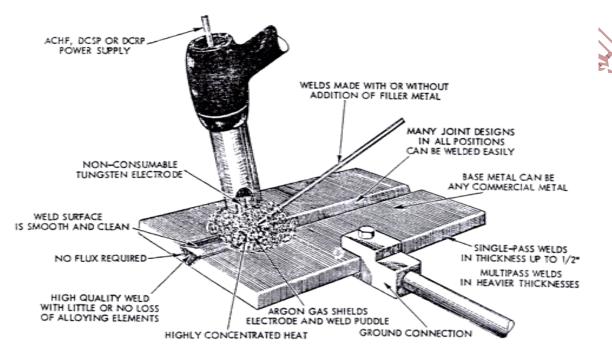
In TIG welding, a non-consumable tungsten electrode is used. It is surrounded by a shield of inert gas. (Linde Co.)
